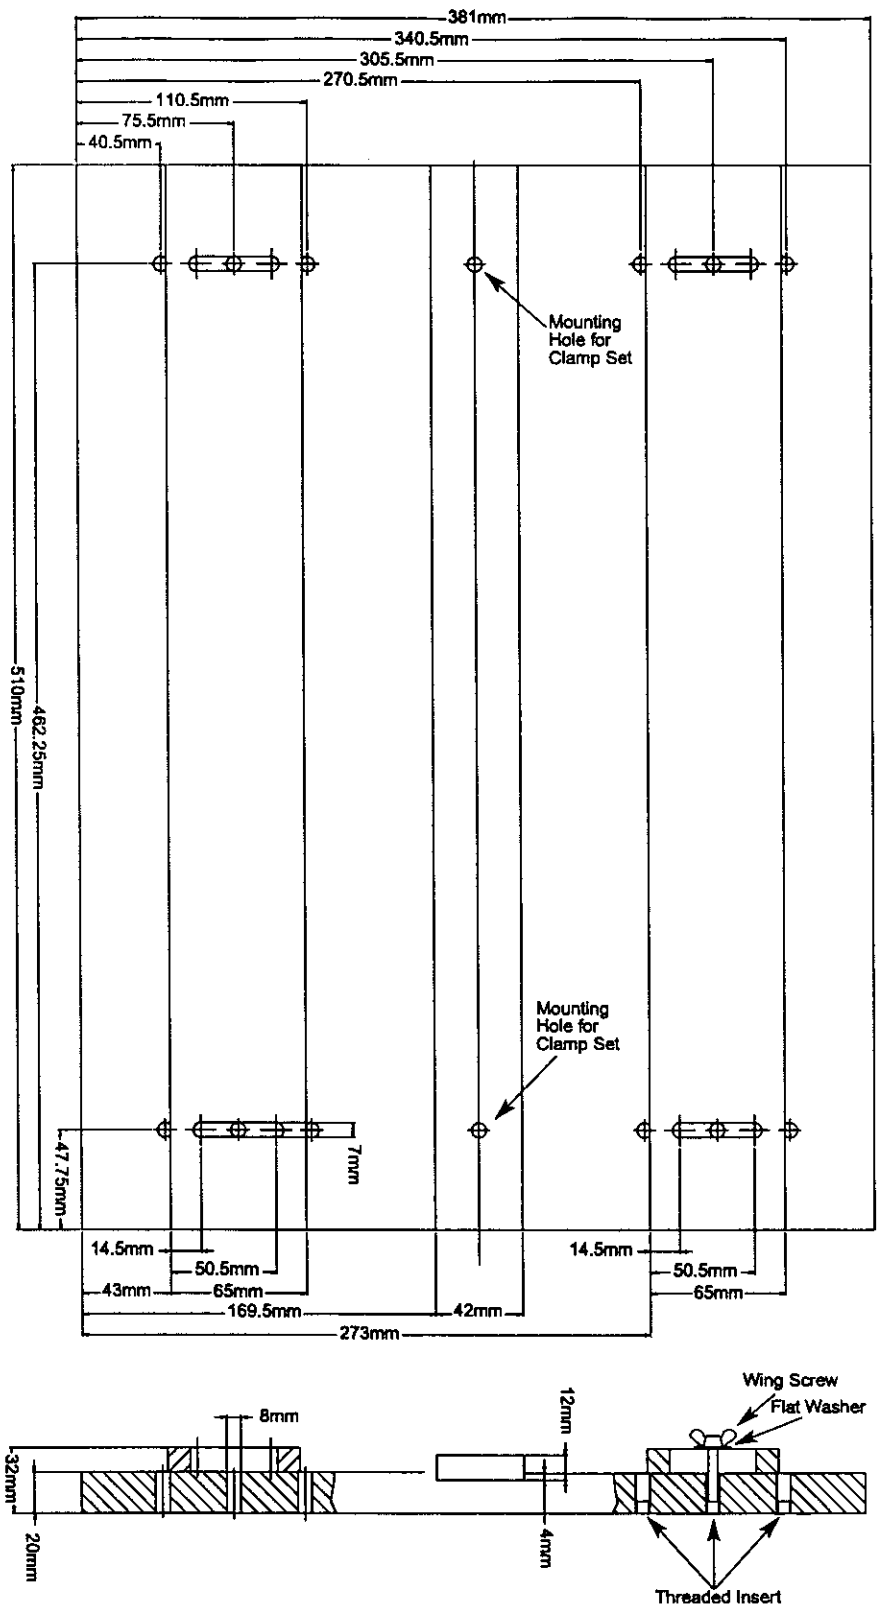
Dimensions for Auxiliary Table and Guide Fences
